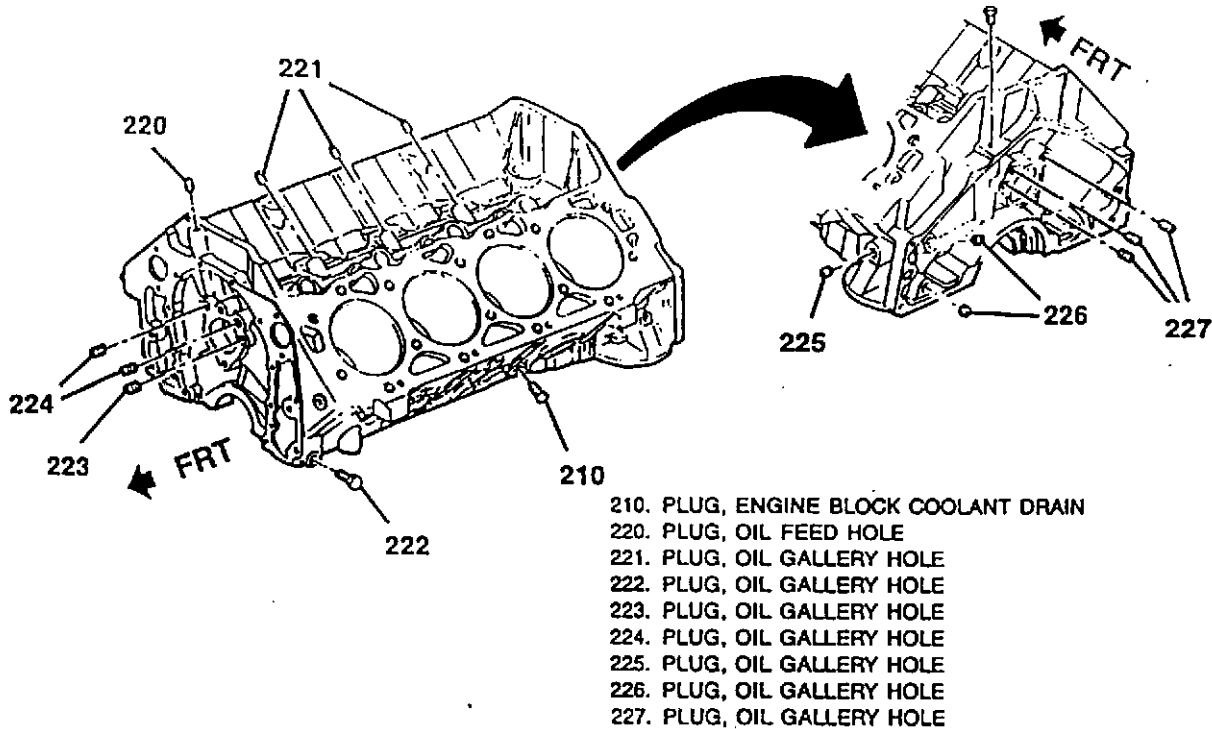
Engine Block Coolant Drain Hole Plug (5.0L and 5.7L Engines)
